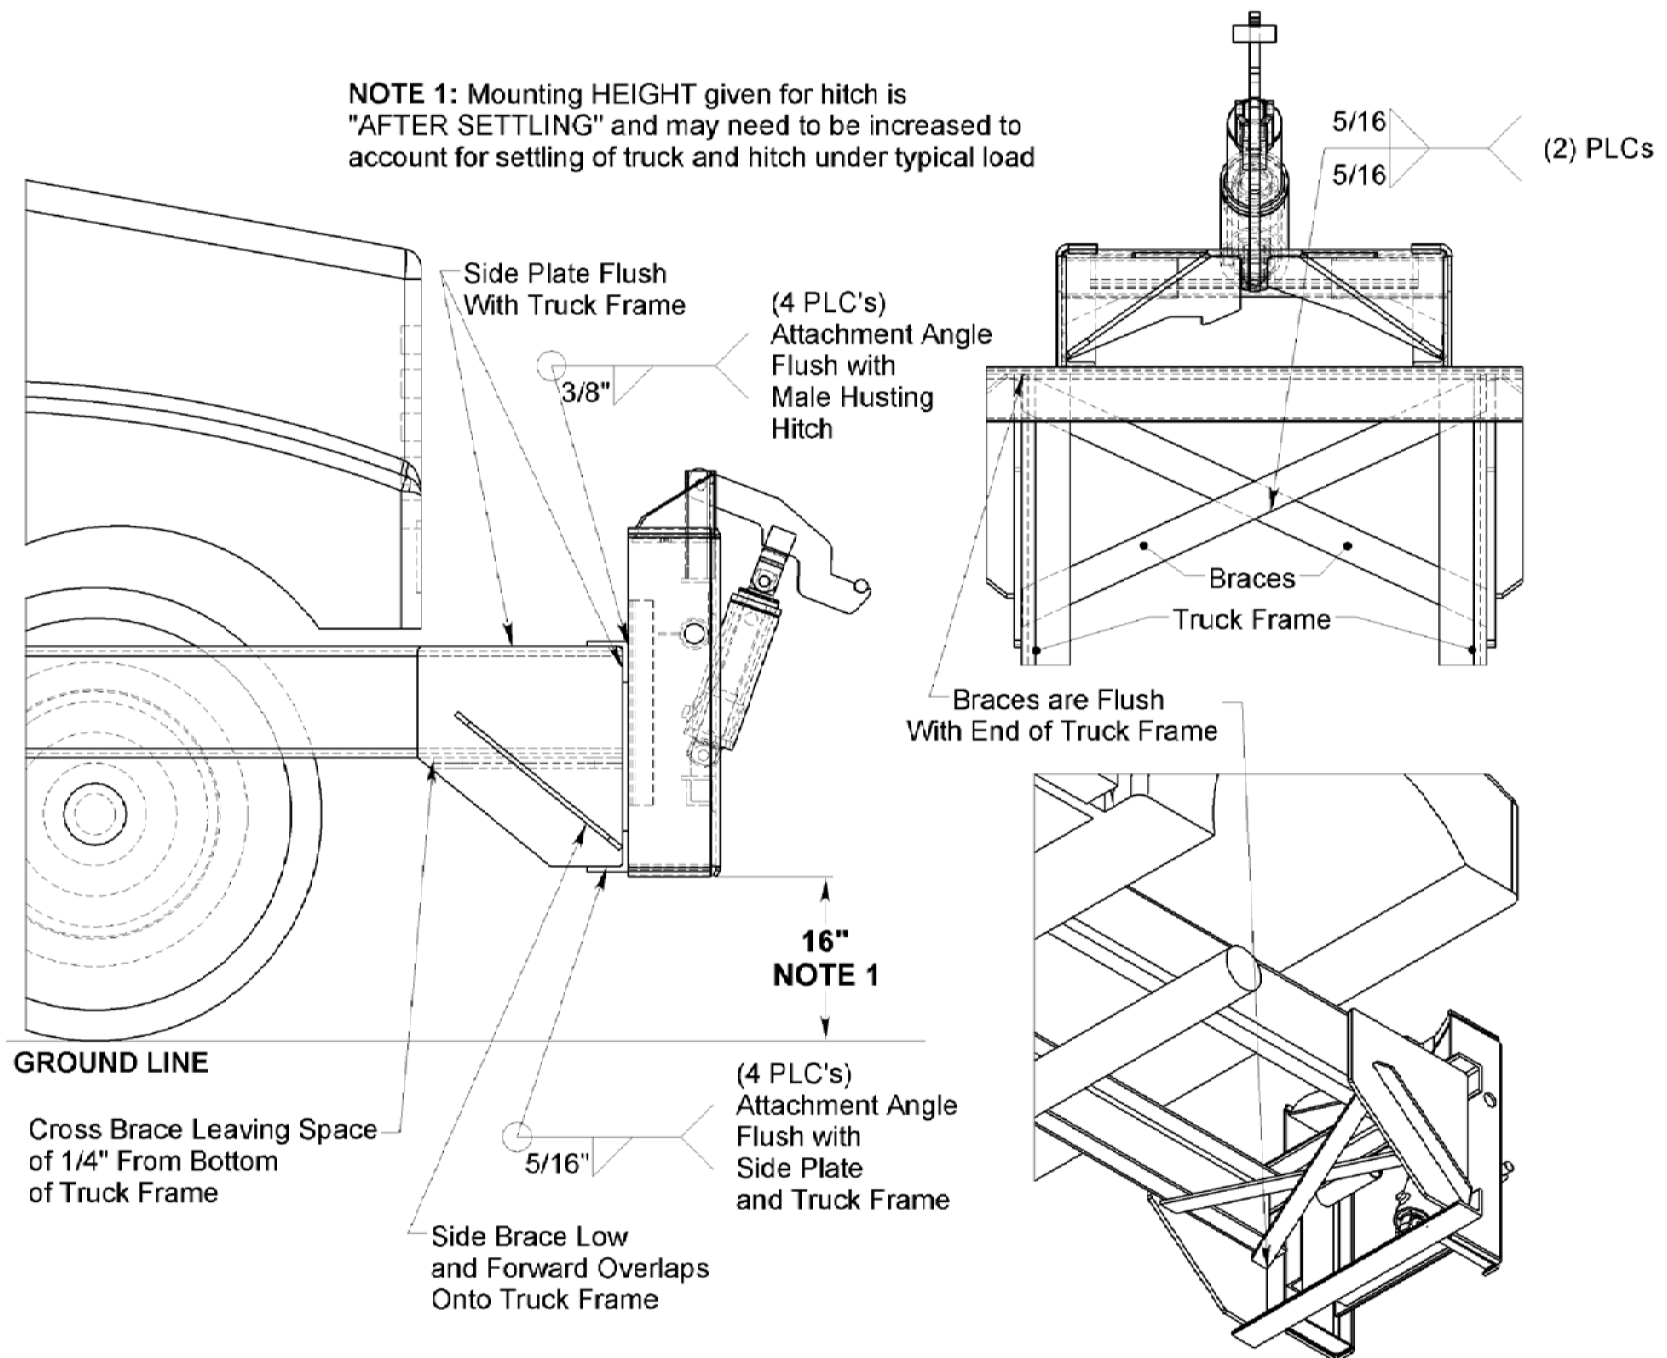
Typical Side Plate Mounting of Husting Hitch
